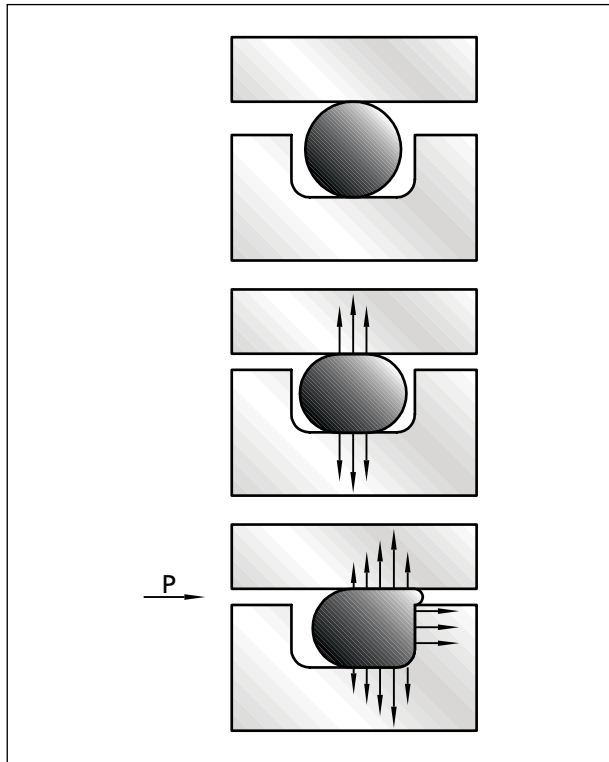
Turel® O-Ring Sealing Forces with and without System Pressure
